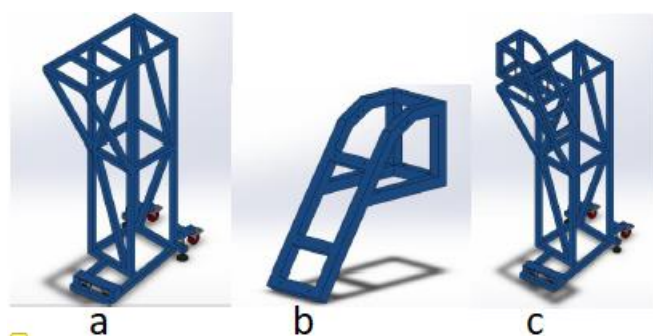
a Frame Lower b Frame Upper c Frame Complete
